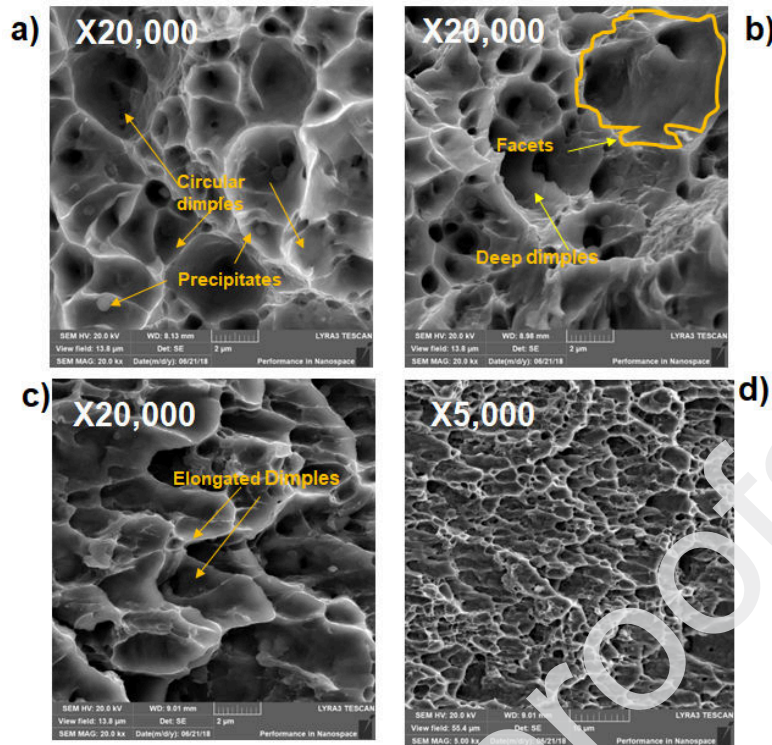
Tensile fracture morphology of WAAM ER70S-6 (a) as-deposited (b) as-deposited + rolled (160 kN) + machined (c) as-deposited + rolled (160 kN(X20, 000)) (d) as-deposited + rolled (160 kN(X5, 000))
